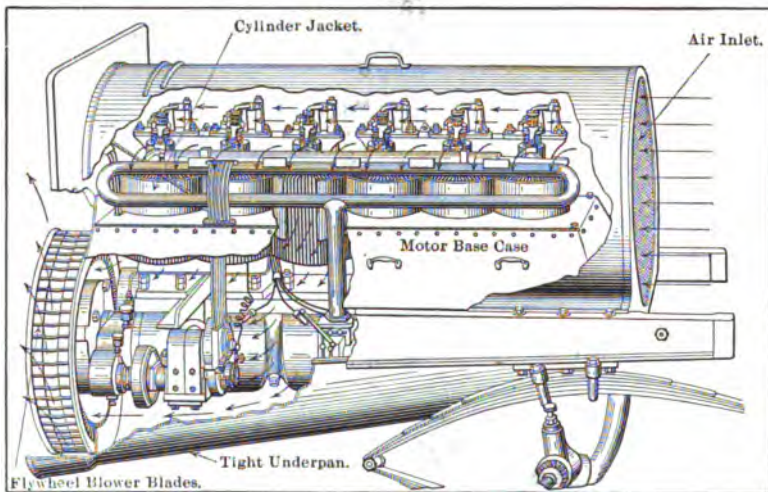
Positive cooling method used on Franklin automobiles, in which all currents are drawn through cylinder jackets by flywheel fan suction.
